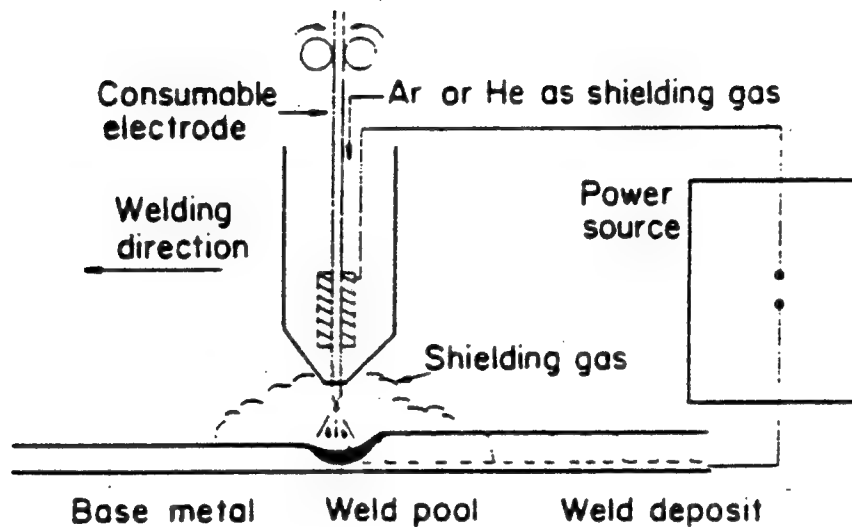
GMA welding process [Kou, 1987]
